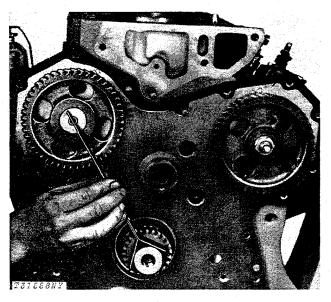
Timing the Camshaft Gear with JD-254 Tool
